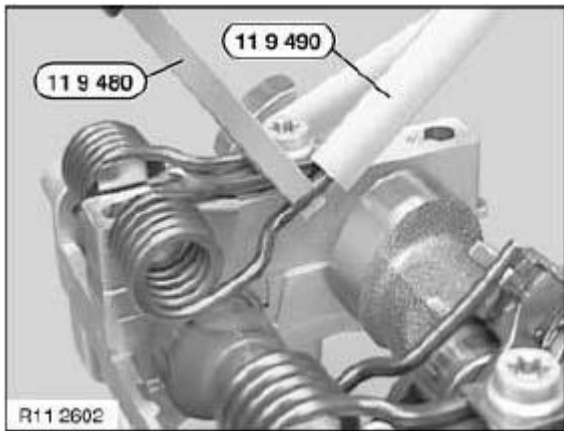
Identifying Special Tool (11 9 480) And (11 9 490)
